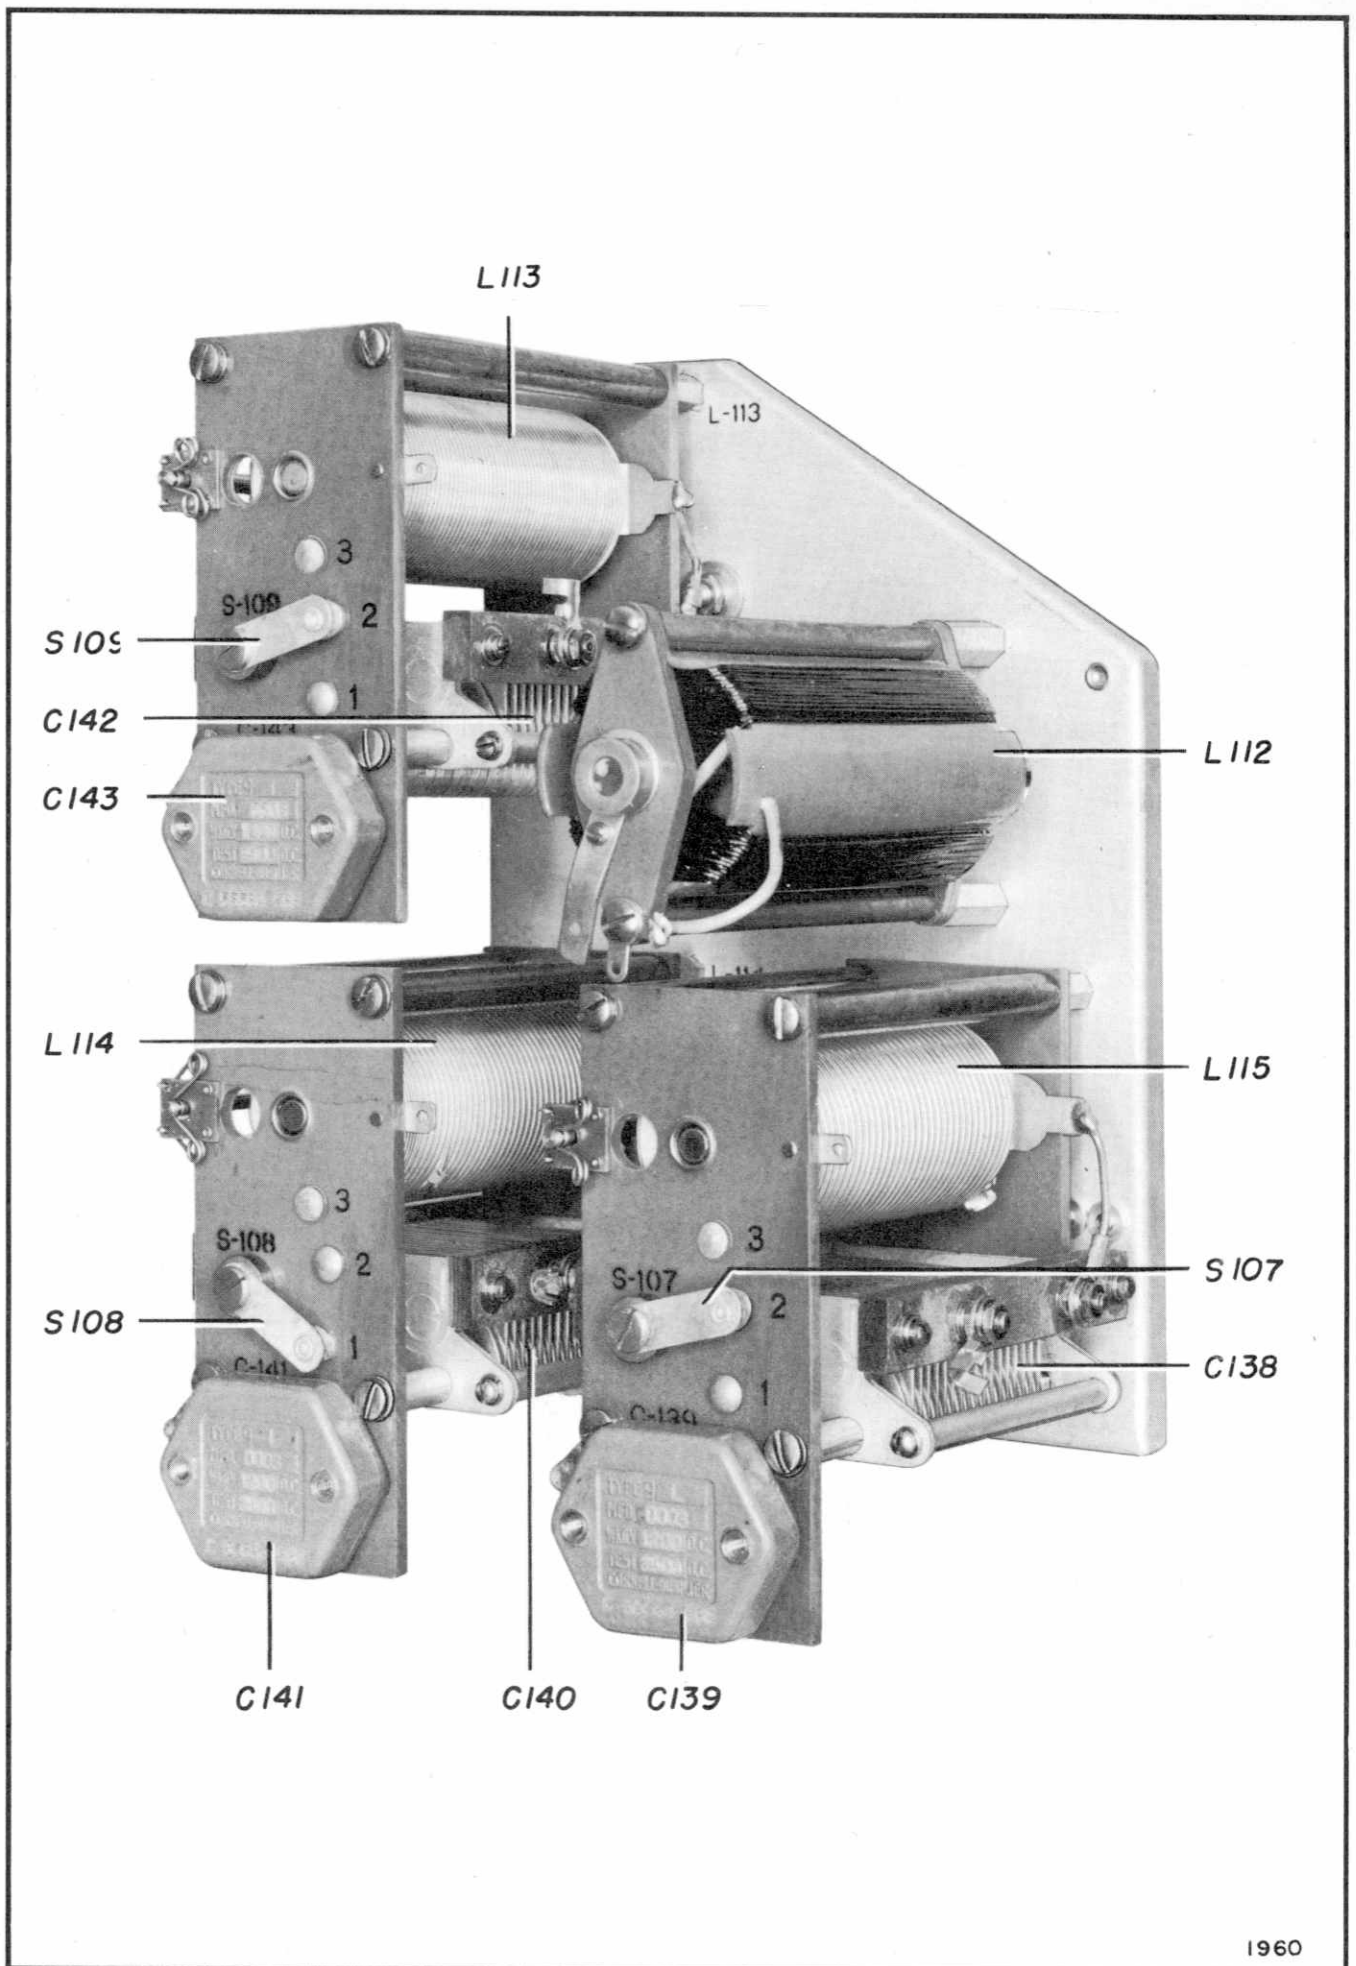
REAR VIEW COIL AND CAPACITOR ASSEMBLY
